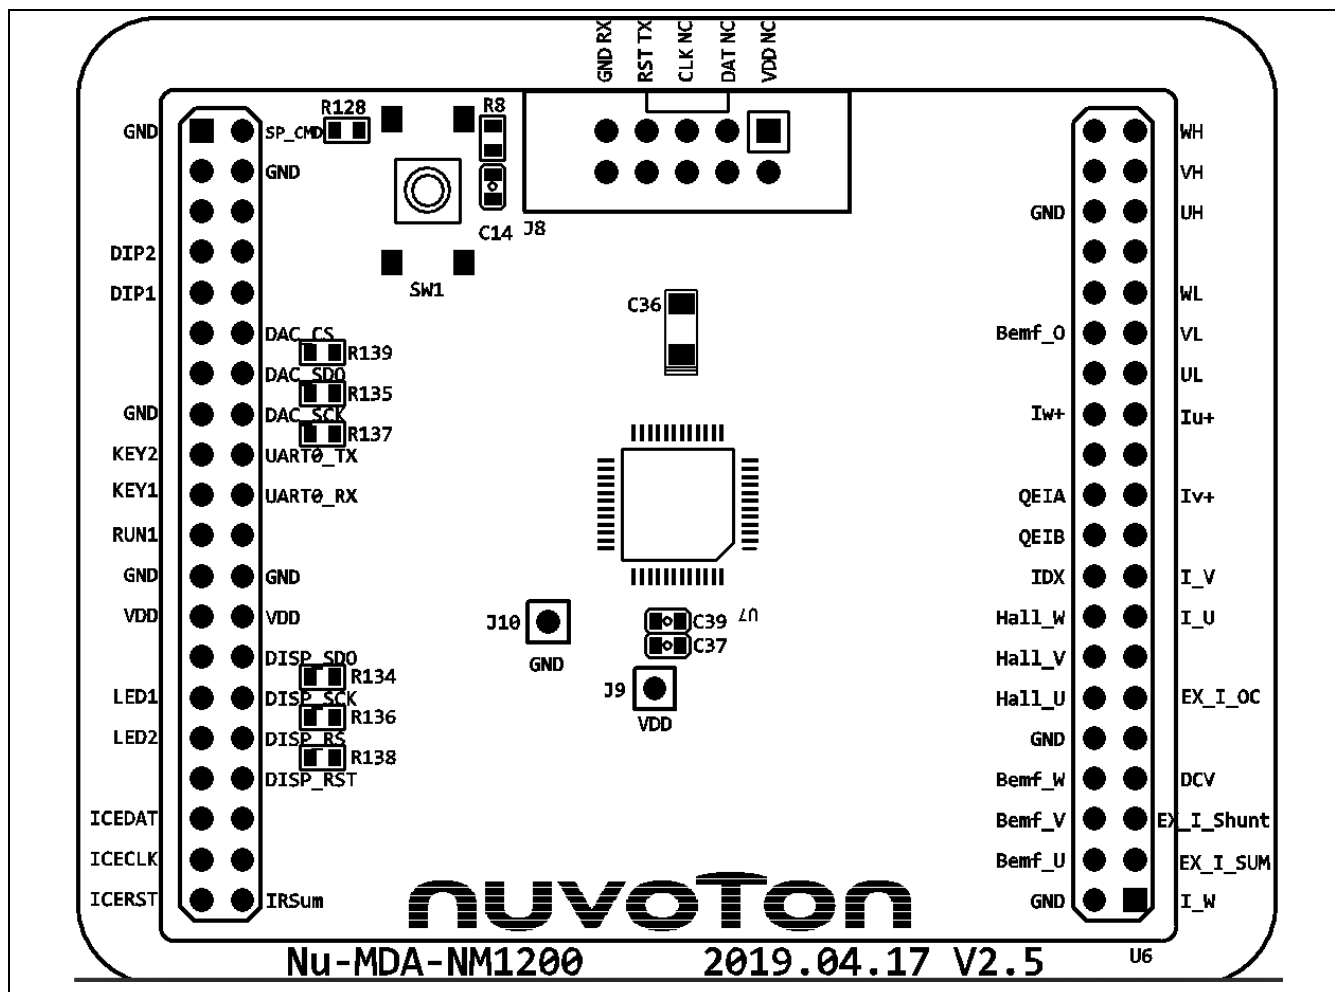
Nu-MDA-NM1200 PCB Placement
